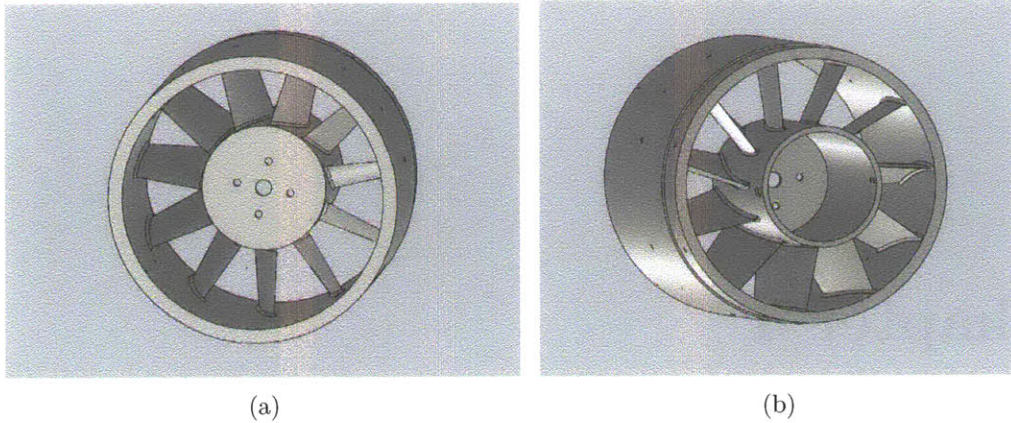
Machined aluminum shrouded stator: a) view from upstream; b) view from downstream.
